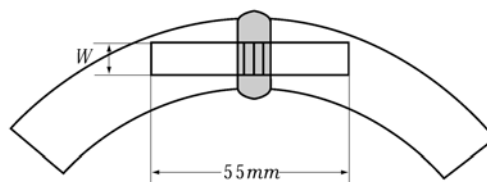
The position of selection for impact test specimen taken from the weld zone of electric-resistance welded steel pipes
